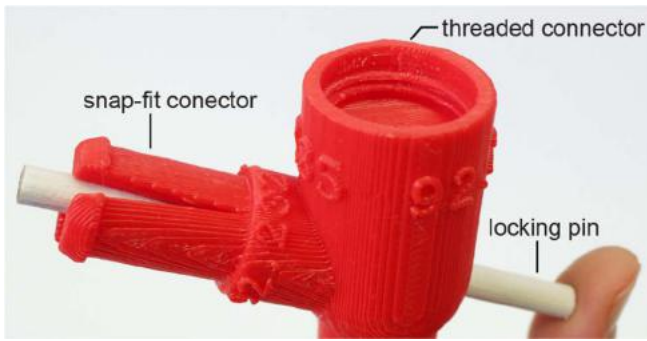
3D printed hub with snap-fit and threaded bottle connectors.
